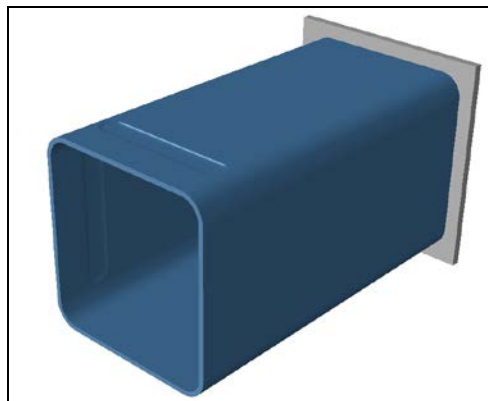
Crush Tube (Revised Design) with Front Plate Removed
